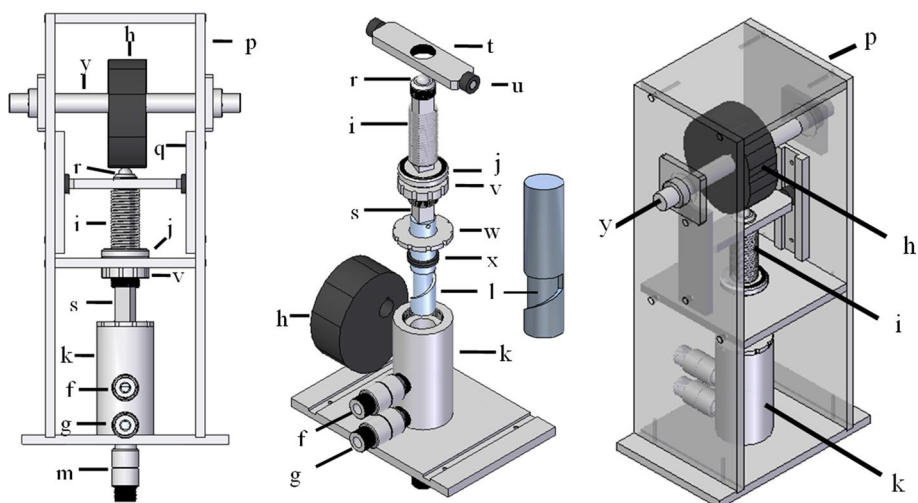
Liquid dosing injection unit. a Front view. b Exploded view. c Isometric view
